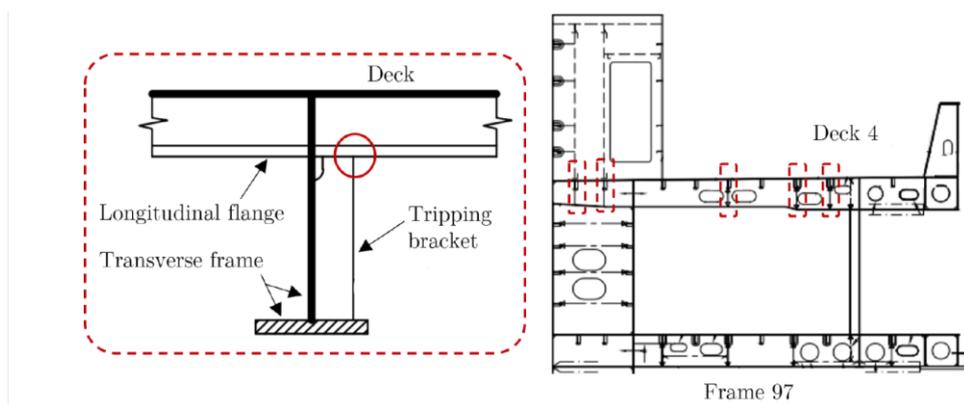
Longitudinal deck stiffener to a transverse web frame connection.
